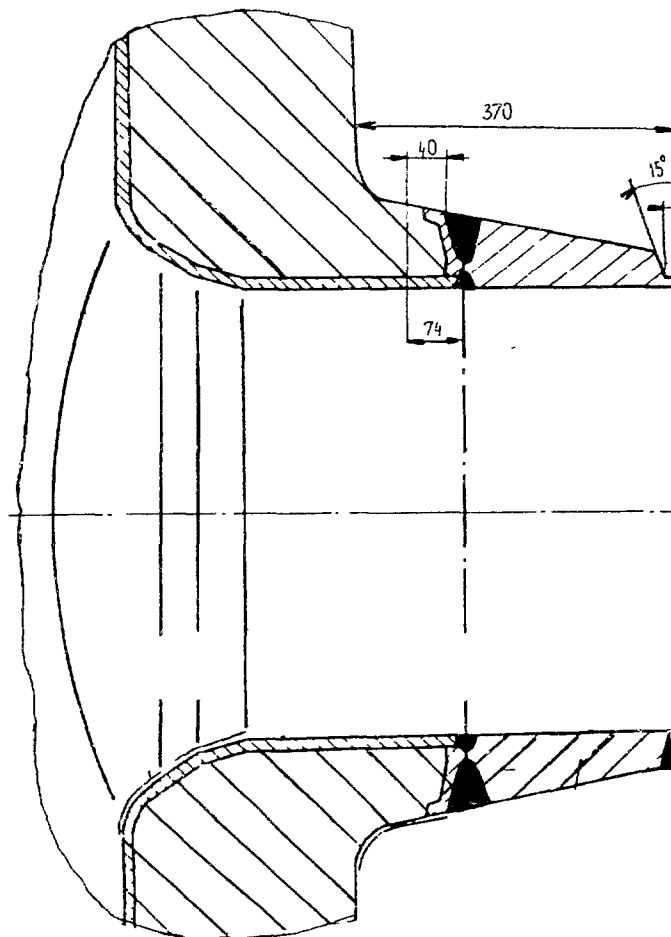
Machined or extruded nozzle design of WWER RPV.
